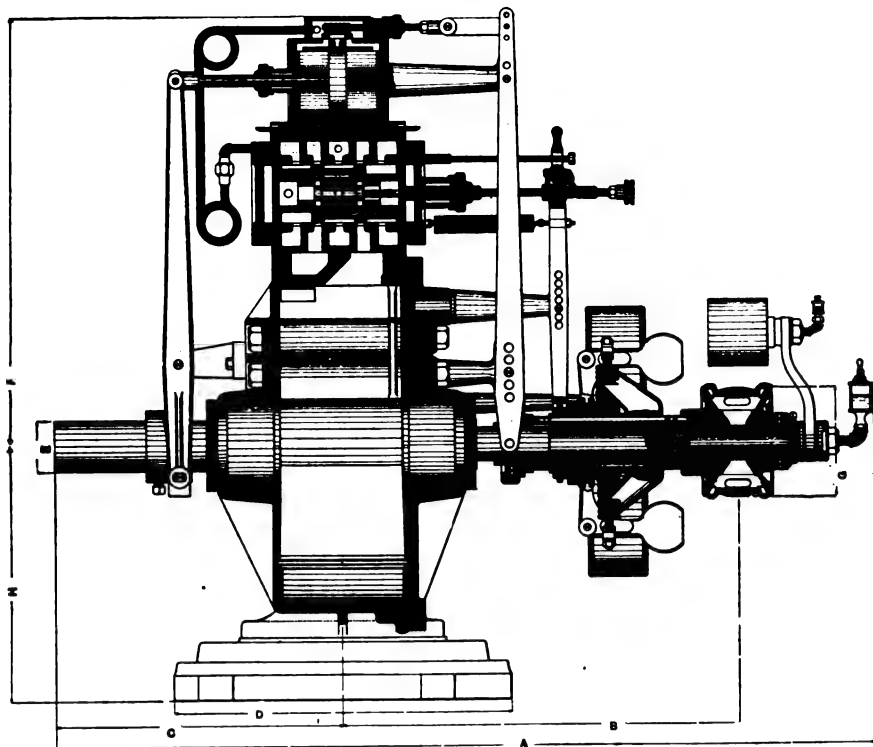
SECTION THROUGH STURGESS GOVERNOR
